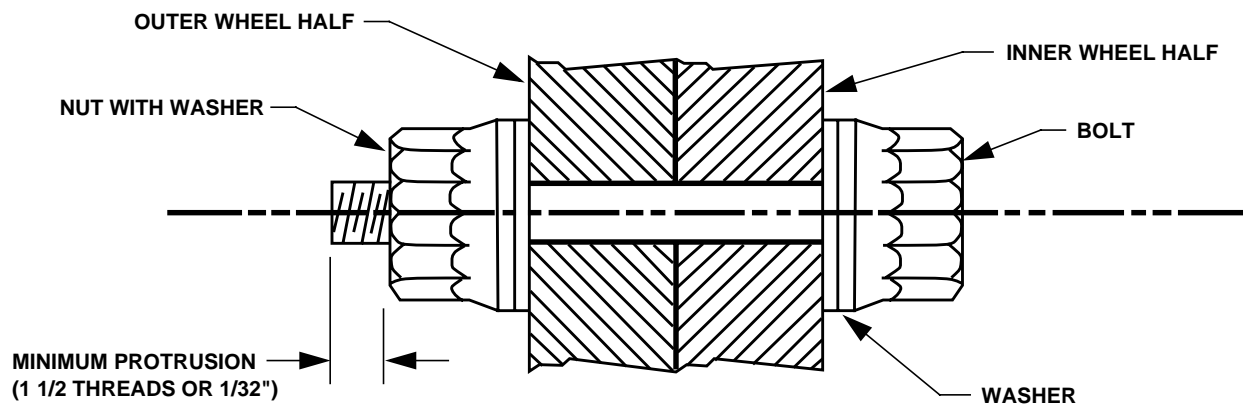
WHEEL BOLT PROTRUSION REQUIREMENT
